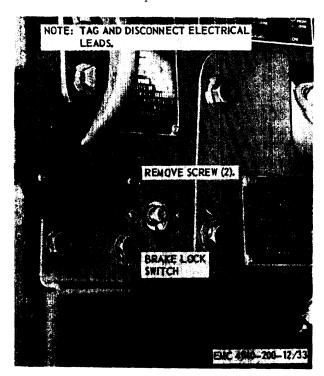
Electric brake lock switch, Model SECM, removal and instillation.
